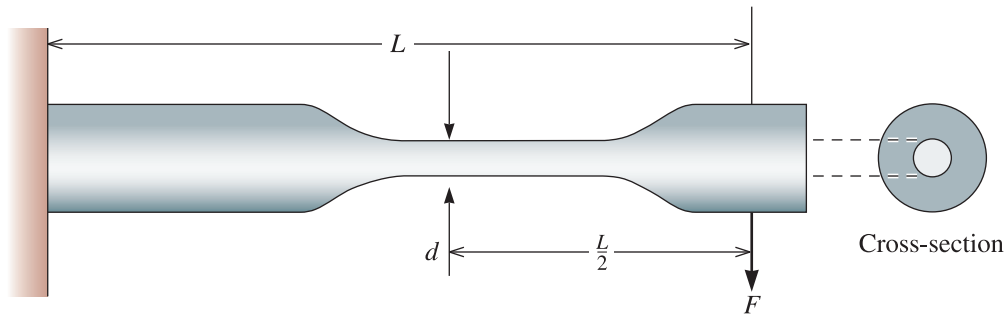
Geometry for the rotating cantilever beam specimen setup.
